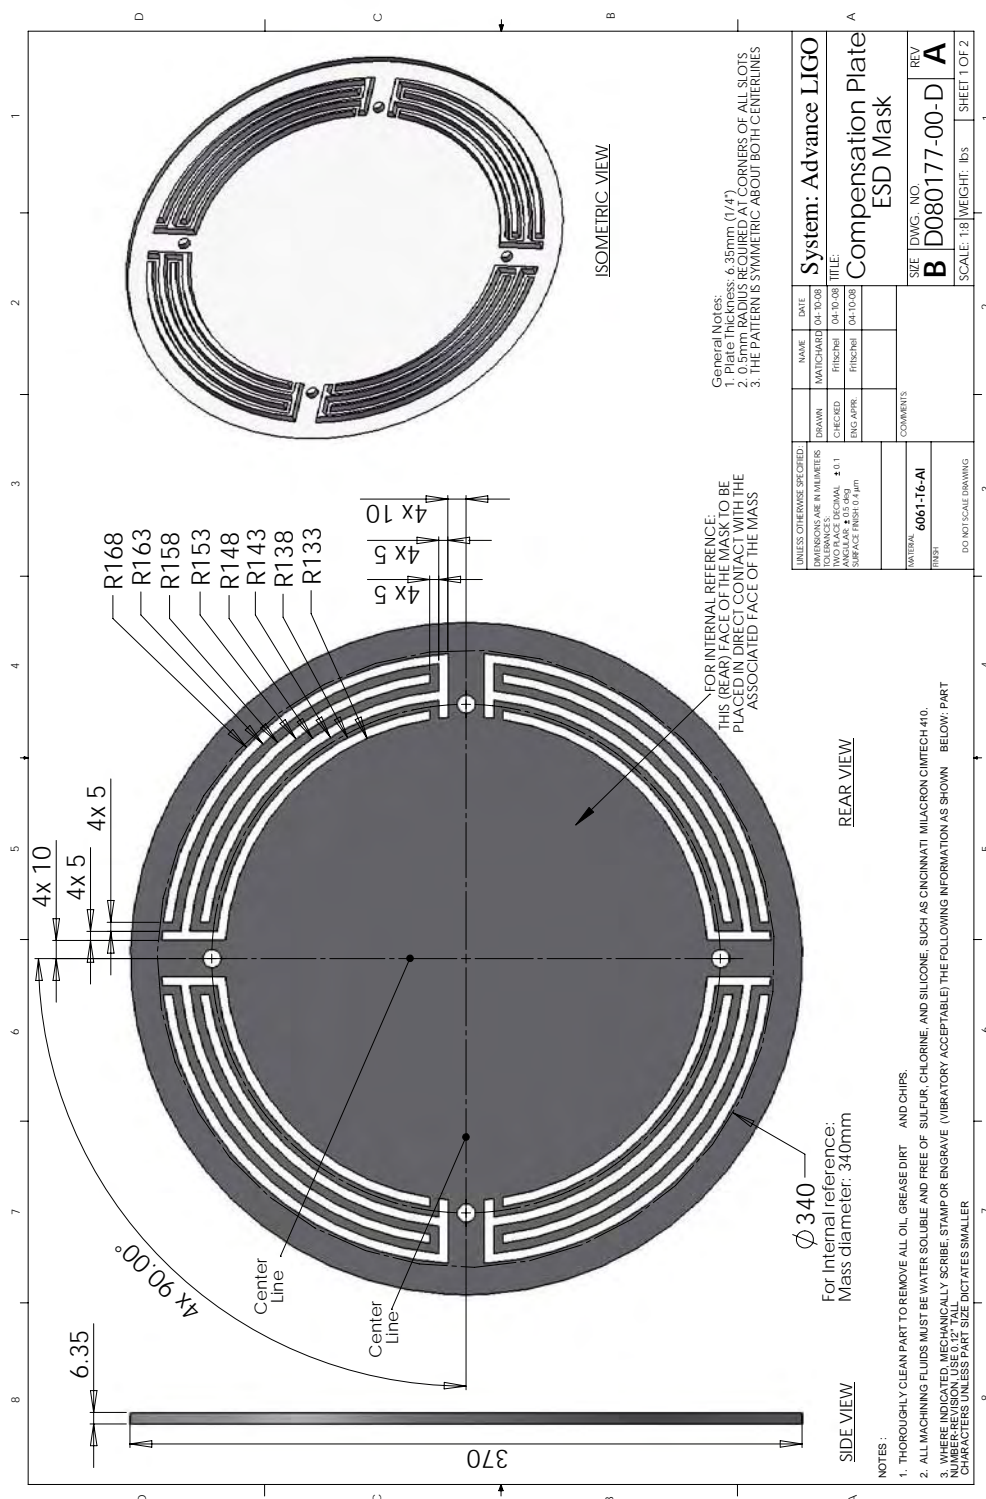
Technical drawing of mask used in manufacture of LASTI prototype ESD (1 of 2). We assume perfect manufacturing and use the dimensions given in our model.
